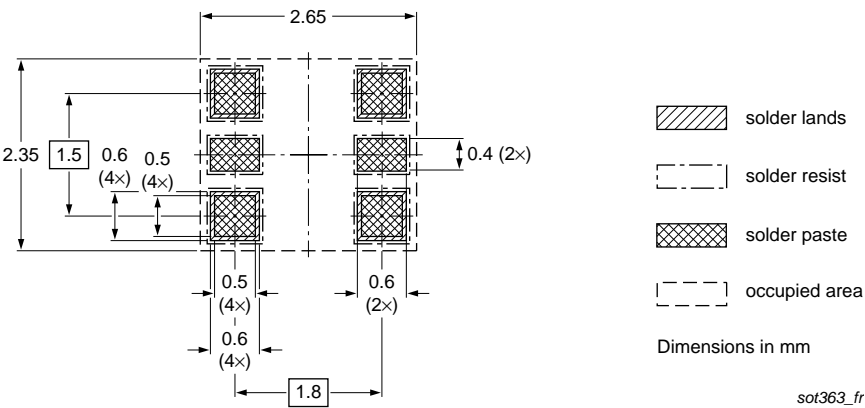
Reflow soldering footprint for SOT363 (TSSOP6)
